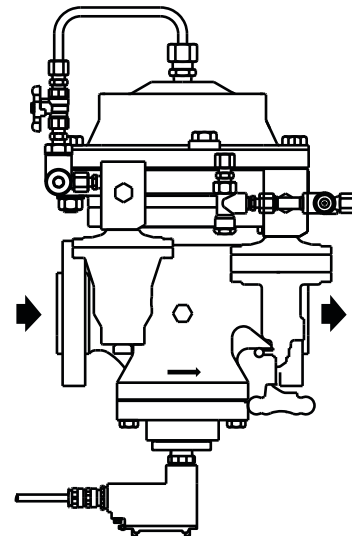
Type RPE Regulator Bottom Electrical Heater Installation
